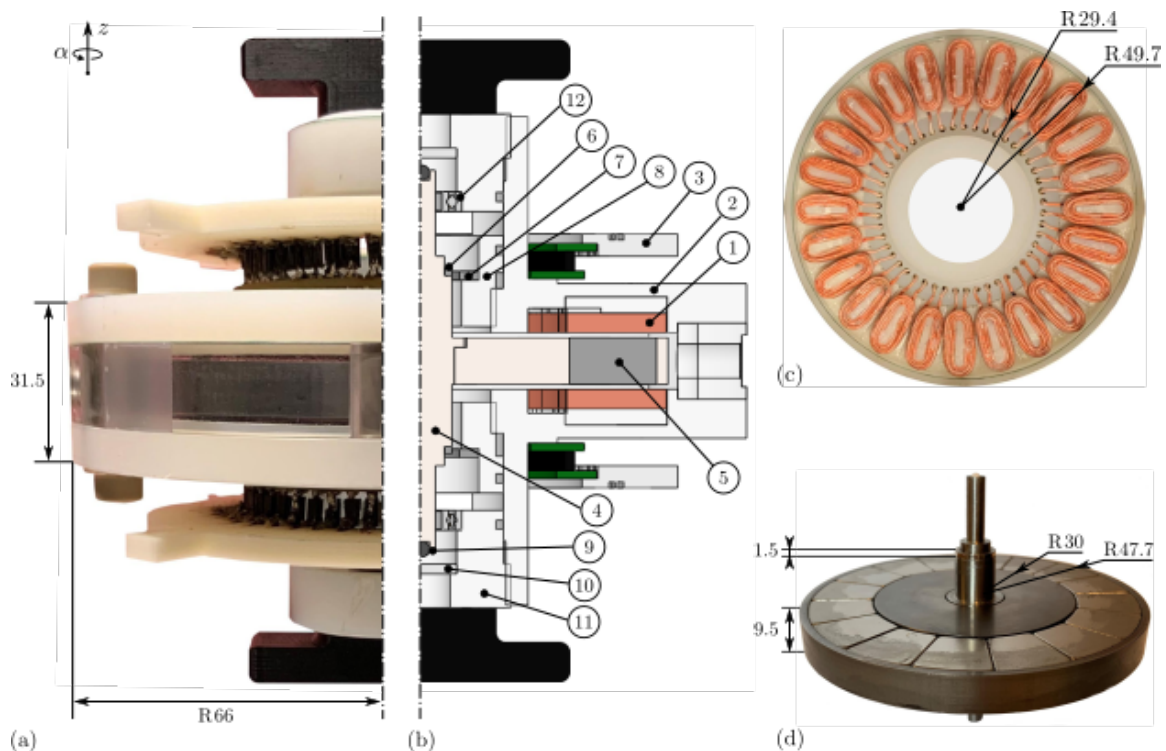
Fully passively levitated machine prototype (from [37]). (a) Picture of the machine. (b) Cross-sectional view with (1) the coils, (2) the non-magnetic non-conductive frame, (3) the printed circuit board, (4) the stainless steel shaft, (5) the PM arrangement, (6) the rotating PM rings and (7) their corresponding stationary rings, (8) and (11) the threaded parts screwed on (2), (9) the landing bearings constituted of a ceramic ball, (10) the stainless steel plate and (12) the radial safety bearings larger than the shaft used in case of instability or failure. (c) Picture of the armature winding. (d) Picture of the rotor.
